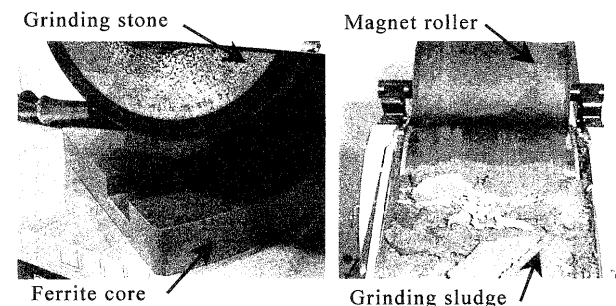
Schematic illustration of grinding machine. Fig. 3 Schematic illustration of magnet roller.
